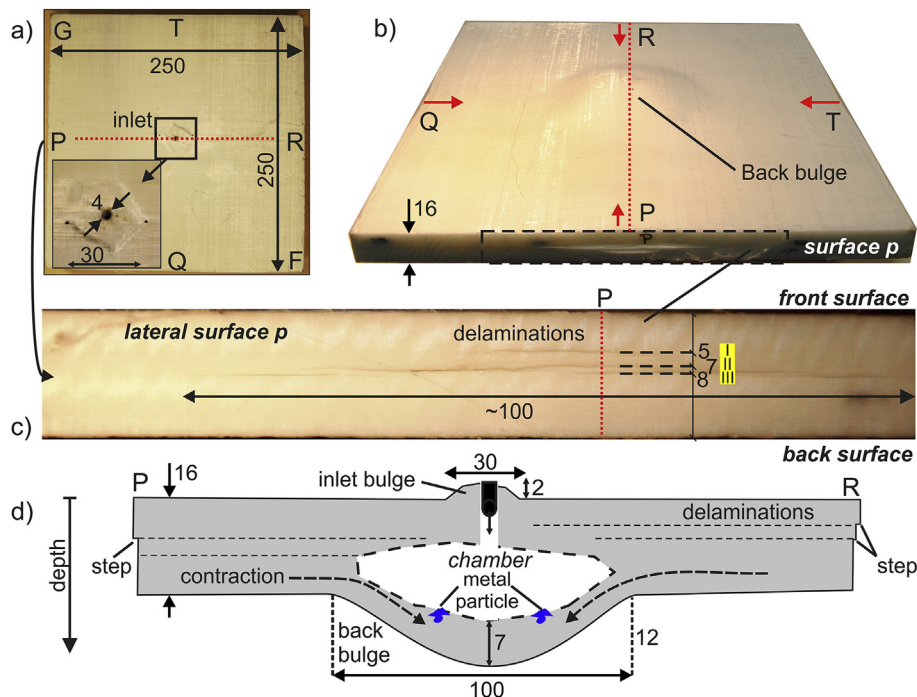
Photographs of the sample: the front surface (a), the back surface (b), and the side view (c). The scheme of the cross-sectional view (d). All dimensions are in mm.
